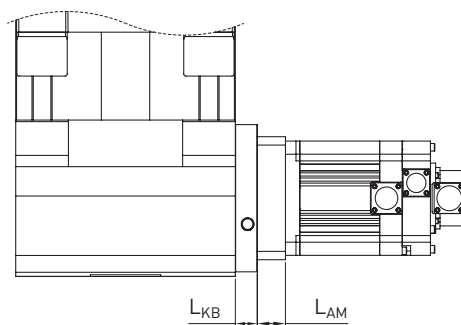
Motor connection of bridge axis HB-B without gearbox
